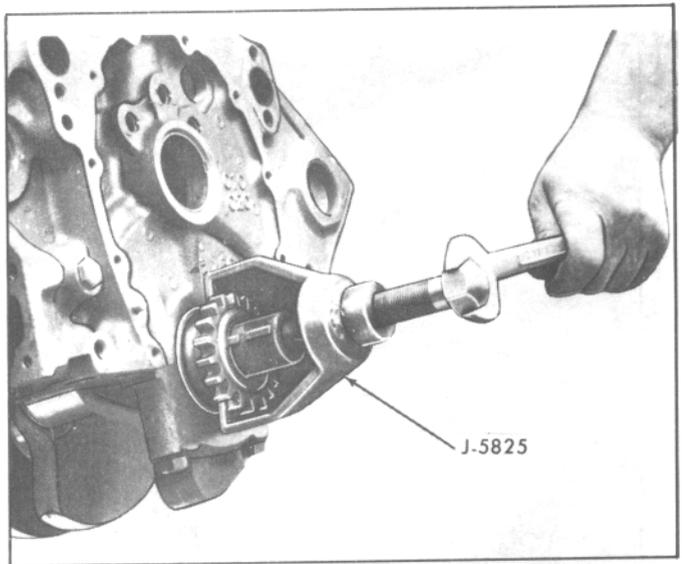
Removing Crankshaft Sprocket "Small V8"
